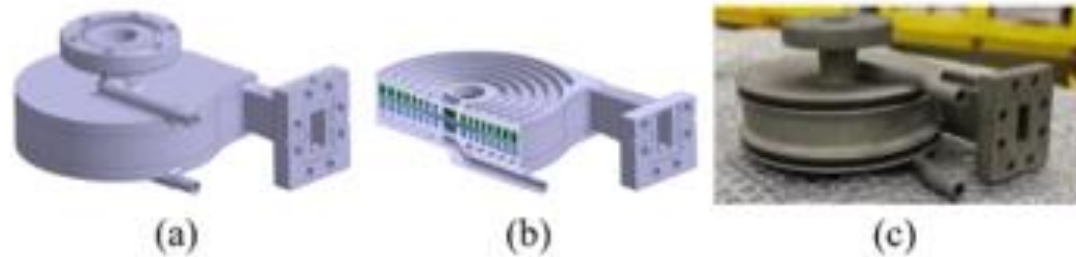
(a) CAD model, (b) cross section showing the spiralized waveguide and vacuum pumping holes, and (c) photograph of additively manufactured spiral rf load [209].
